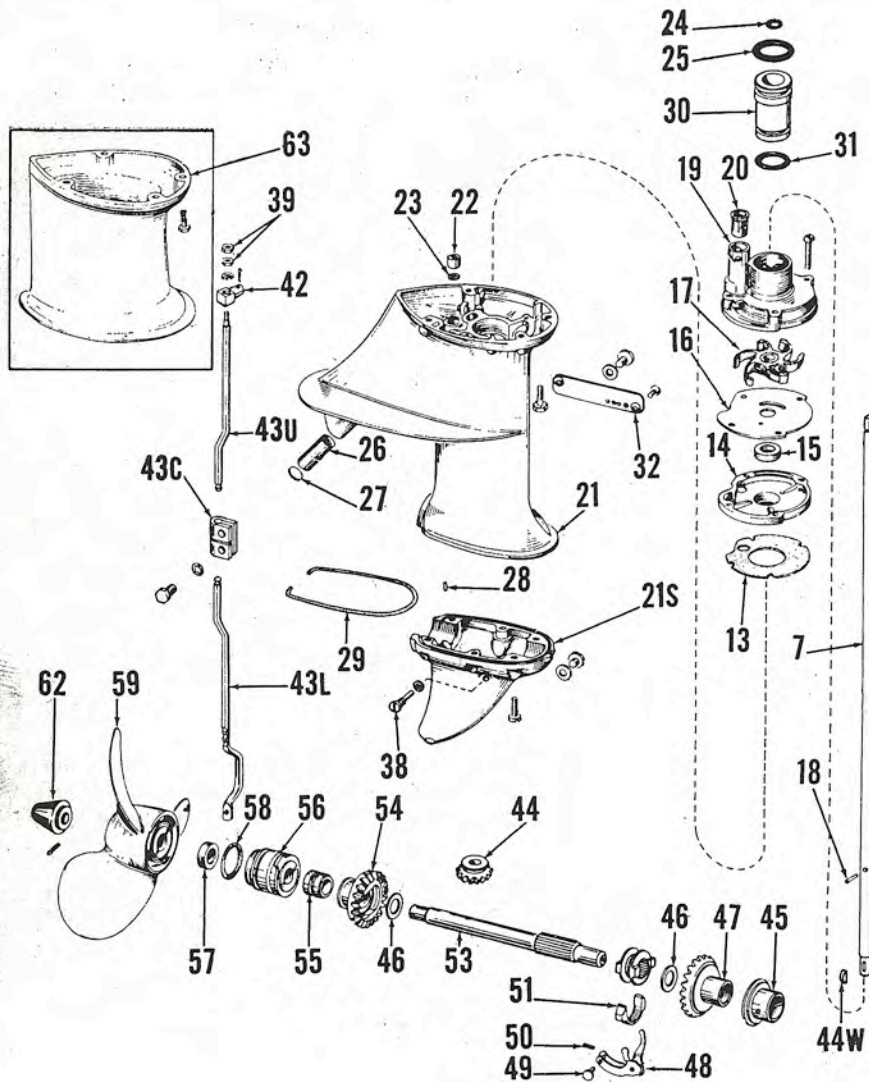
Exploded view of early QD gear case assembly and water pump. All series FD motors are similar. Refer to Fig. J30 for legend except for the following.
